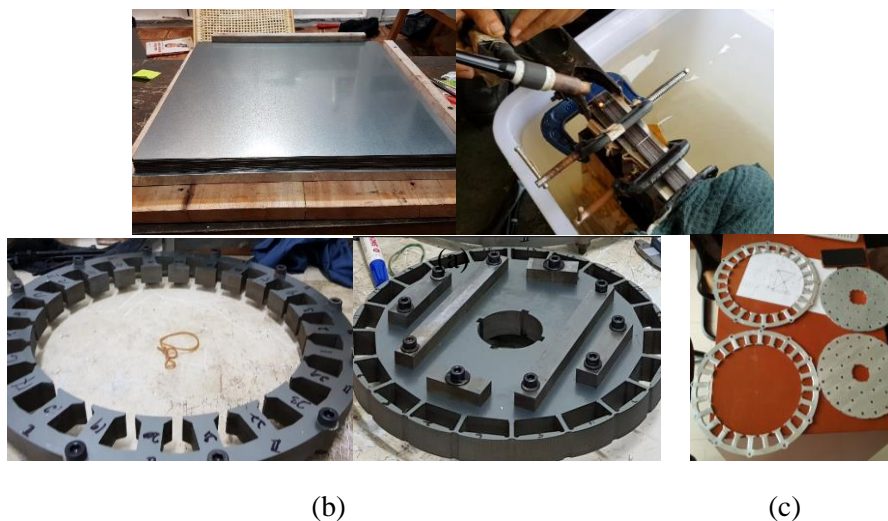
(a) Lamination and welding of the silicon steel, (b) rotor and stator core after laser welding, (c) rotor and stator aluminium cover.
